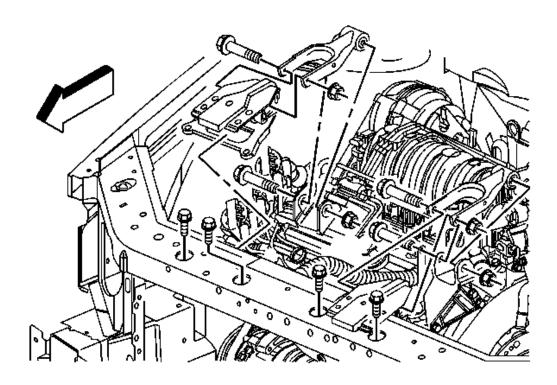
Right Engine Mount Strut Bolt & Nut Courtesy of GENERAL MOTORS CORP.
